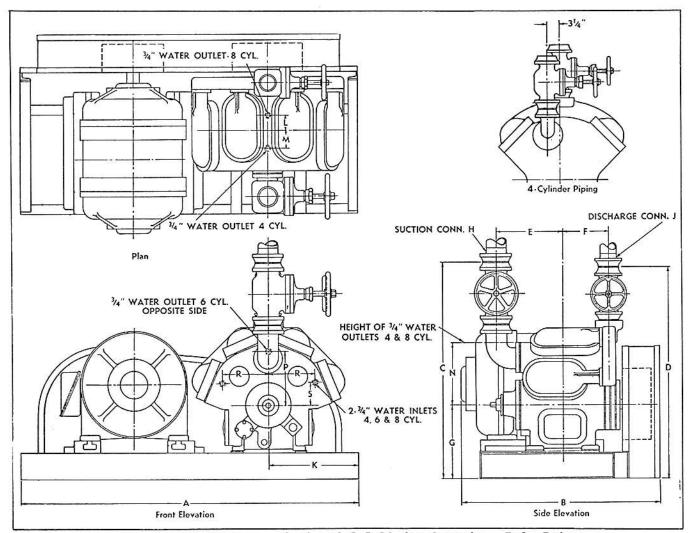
Dimensions - 4, 6 and 8 Cylinder Ammonia - Belt Drive
